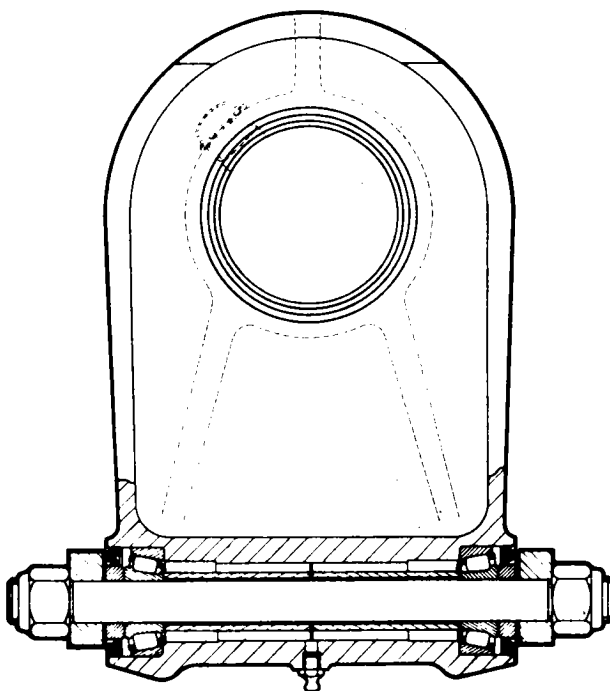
Section through hub carrier and wishbone showing outer fulcrum shaft in position
